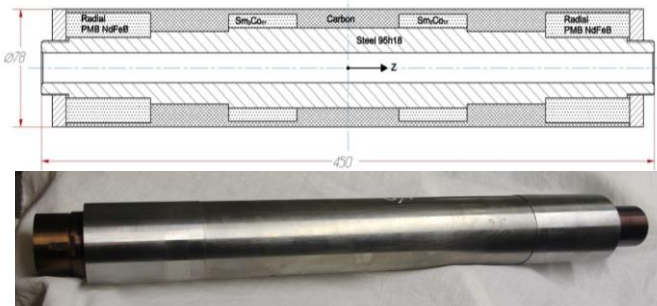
General view of the rotor in the magnetic suspension demonstrator
